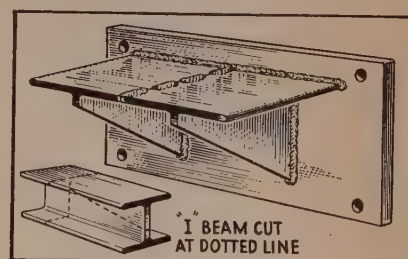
Alternate welded design for low-cost construction. Standard "I" beams are cut and fillet welded to supporting member.
